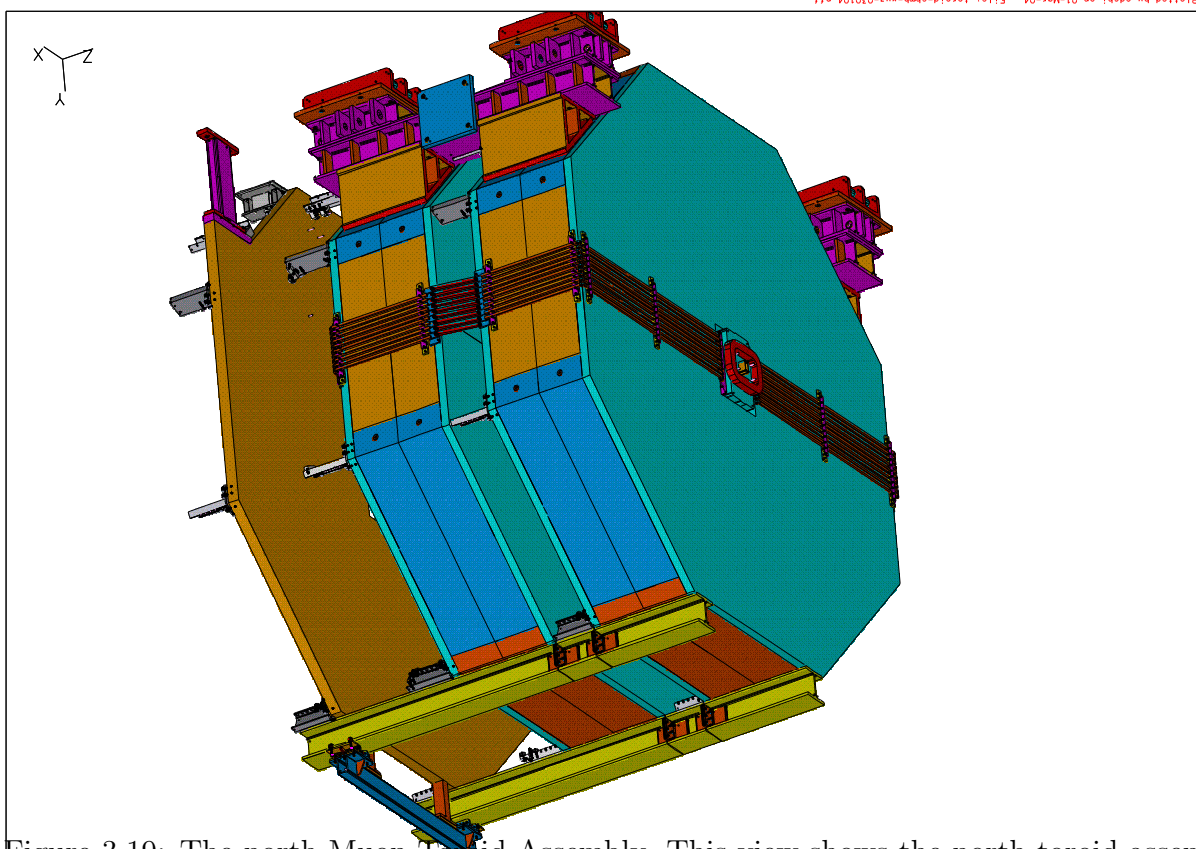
The north Muon Toroid Assembly. This view shows the north toroid assembly ready to be rolled into the Collision Hall. It includes the muon chamber support structure and filter and the roller assembly. The south toroid assembly will reuse the same roller assembly and will not have the muon chamber superstructure.
